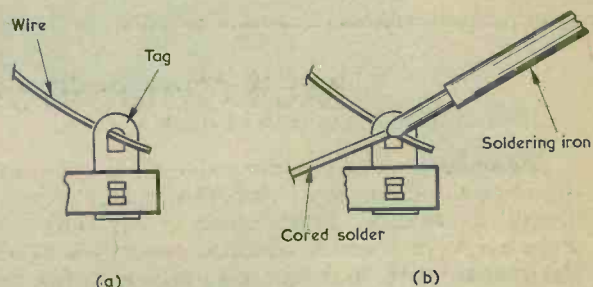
(a). The wire shown here is to be soldered to the tag (b). The tip of the hot soldering iron and the solder are both applied at the same time to the work pieces. The molten solder first speeds the transfer of heat from the iron to the work pieces, and then flows over the pieces to produce the joint.
